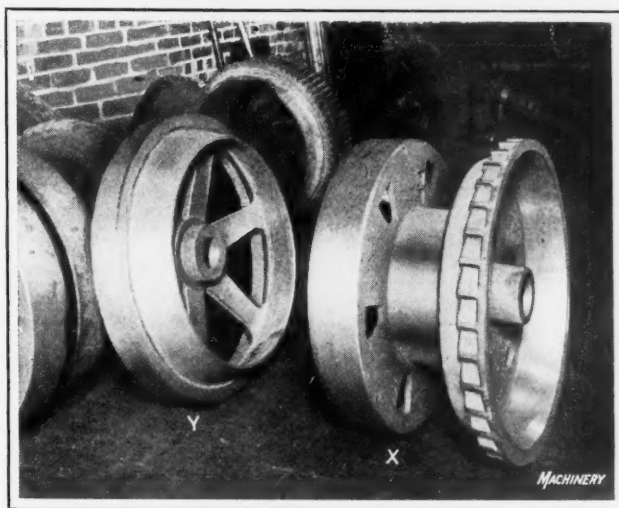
Hoist Drum and Combined Clutch Cone and Gear which are finished in Turret Lathes
